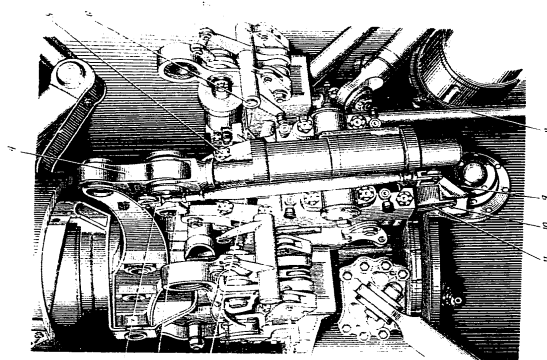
INSTALLATION OF COLLECTIVE PITCH CONTROL HYDRAULIC BOOSTER
